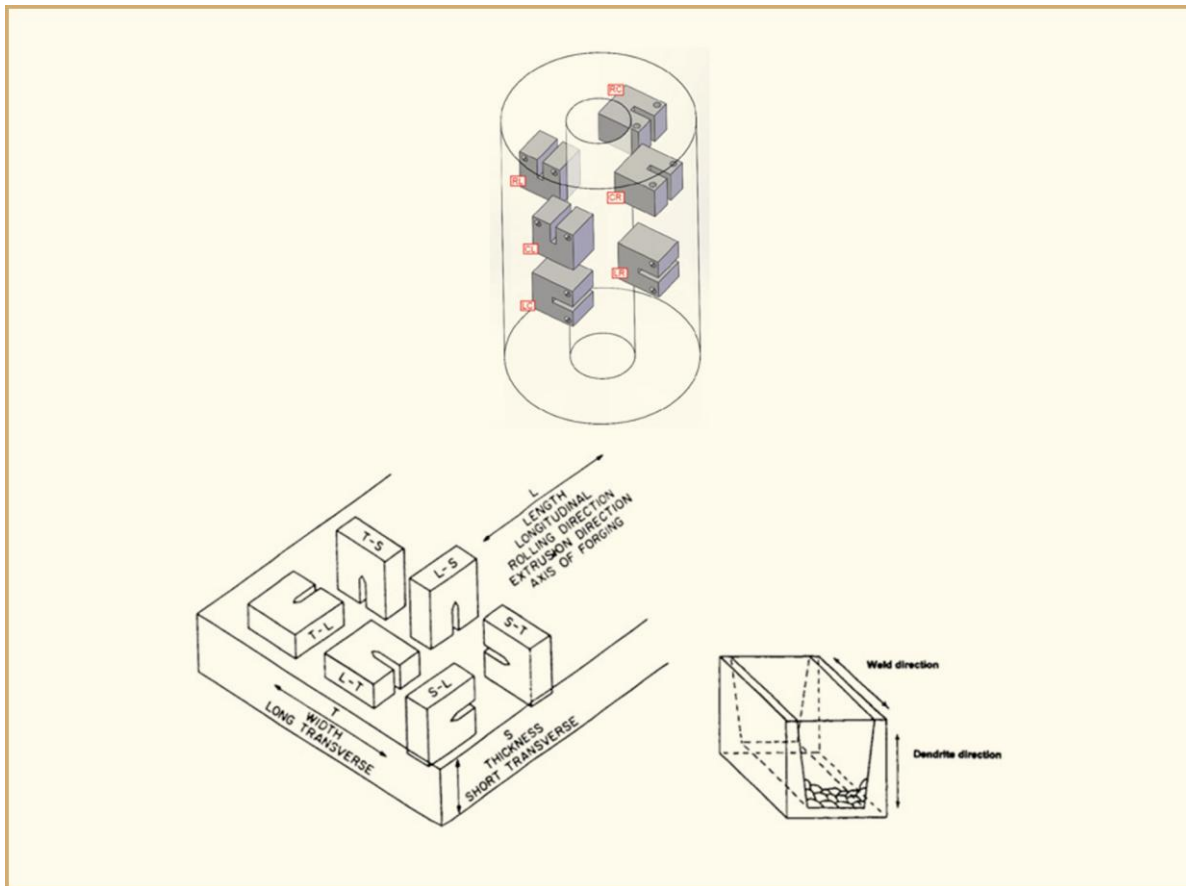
Left: specimen orientations for a cylindrical product form; right: specimen orientations for a plate or weld product form.
